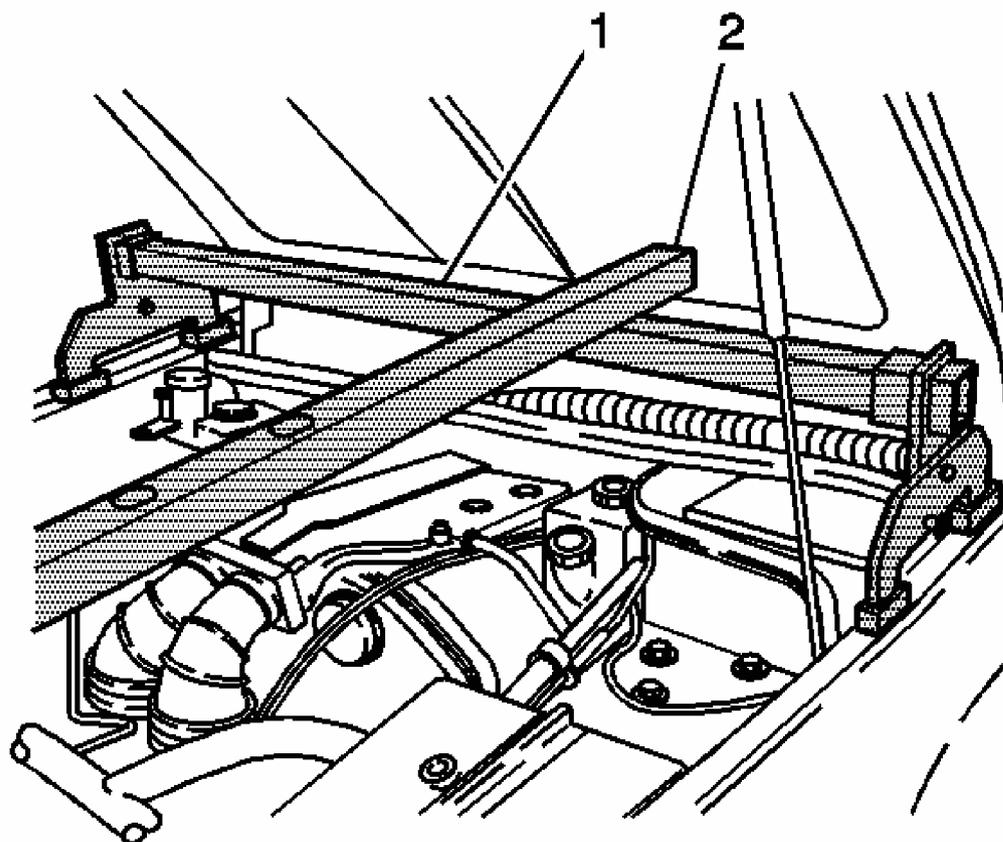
Installing Radiator Shelf Tube On Top Of Strut Tower Tube
